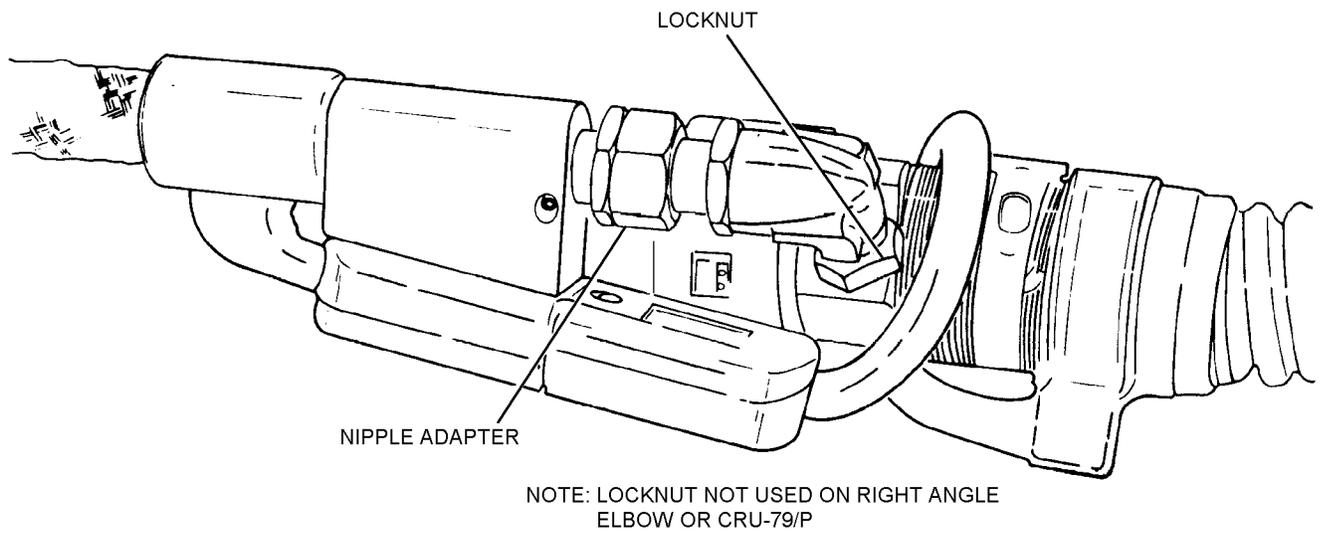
Assembly of Hoses to the CRU-79/P Series Regulator
